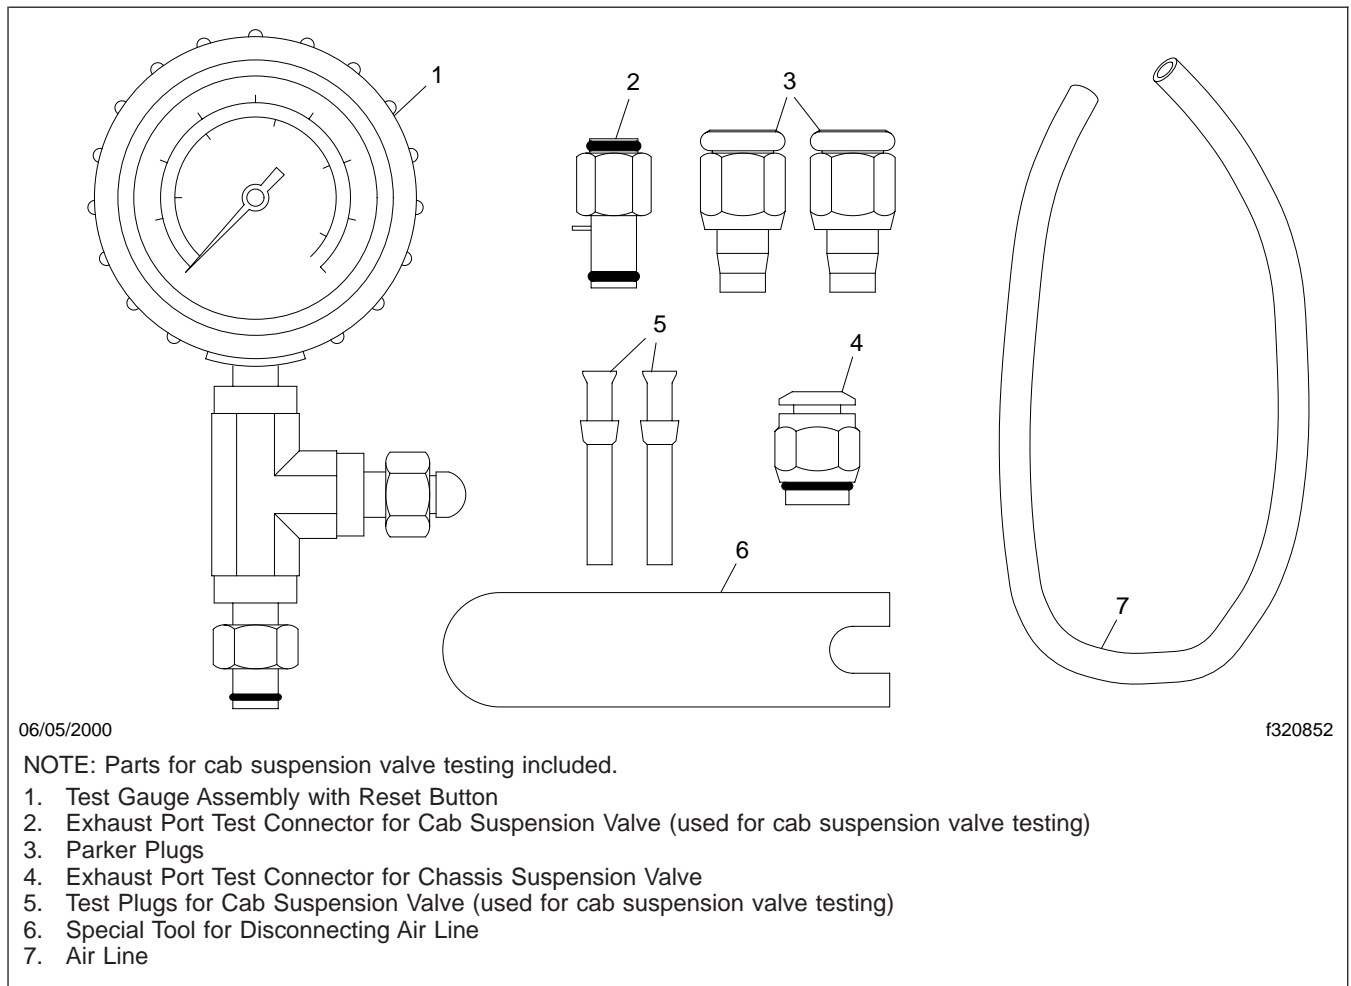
, Barksdale Height-Control Valve Test Kit BKS KD2264
